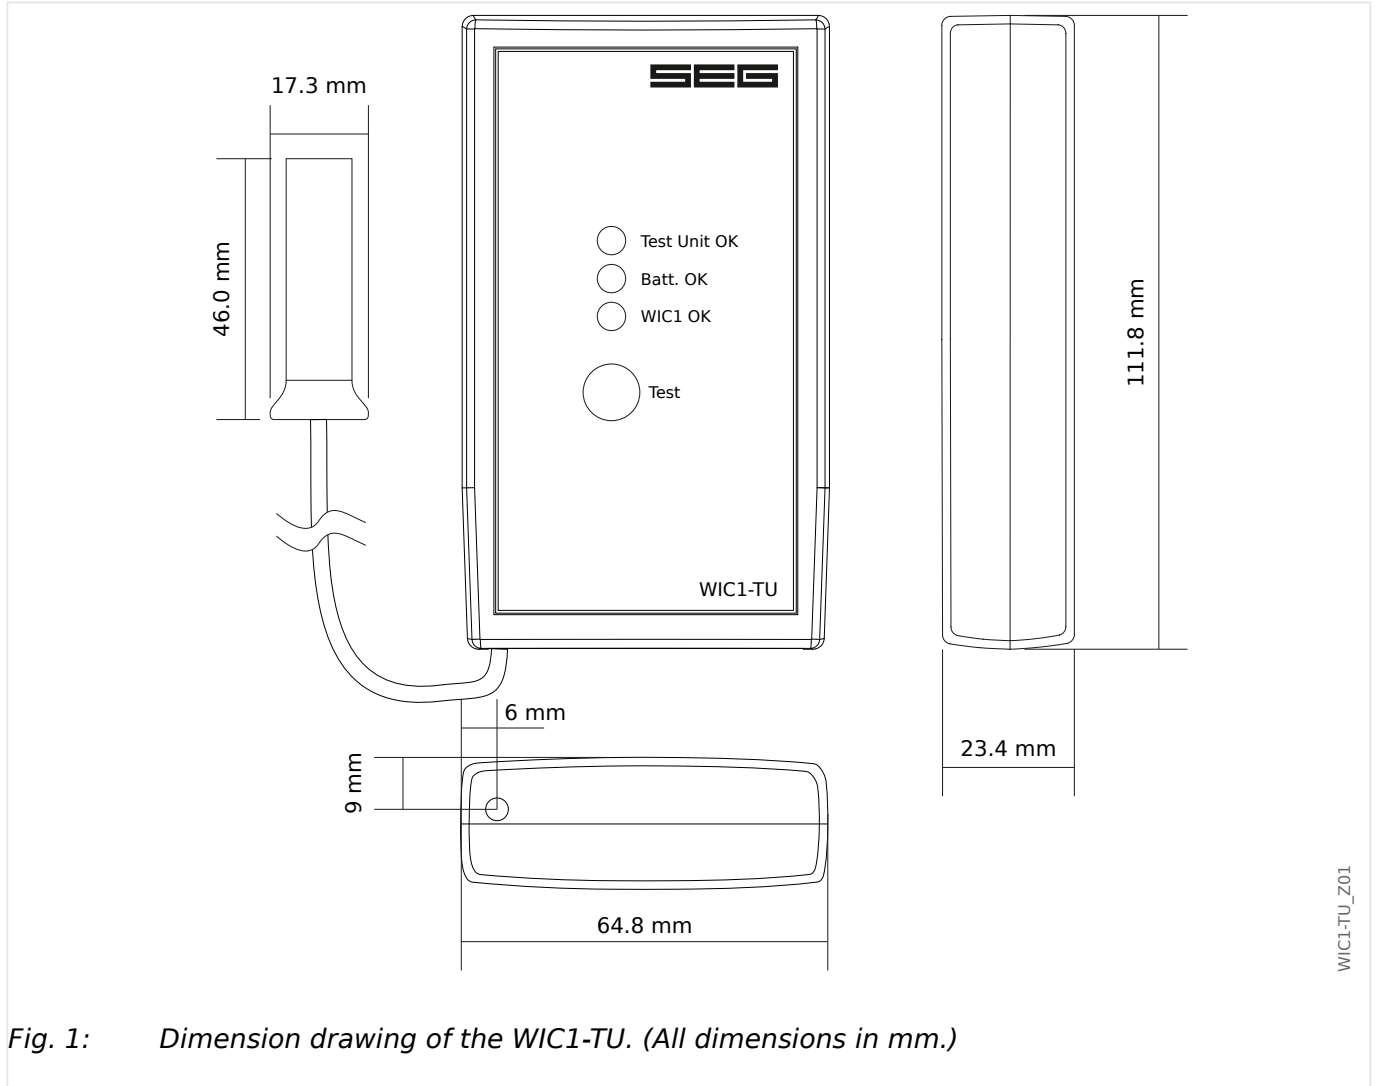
Dimension drawing of the WIC1-TU. (All dimensions in mm.)
